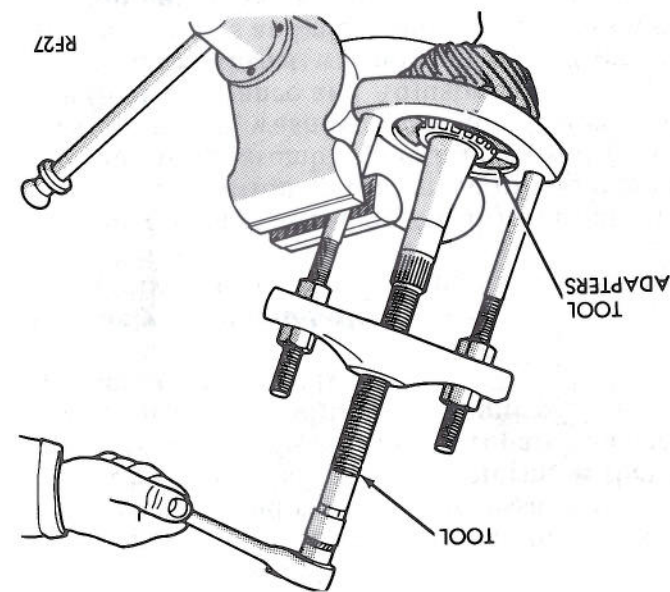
Removing Drive Pinion Rear Bearing Cone (Typical)
